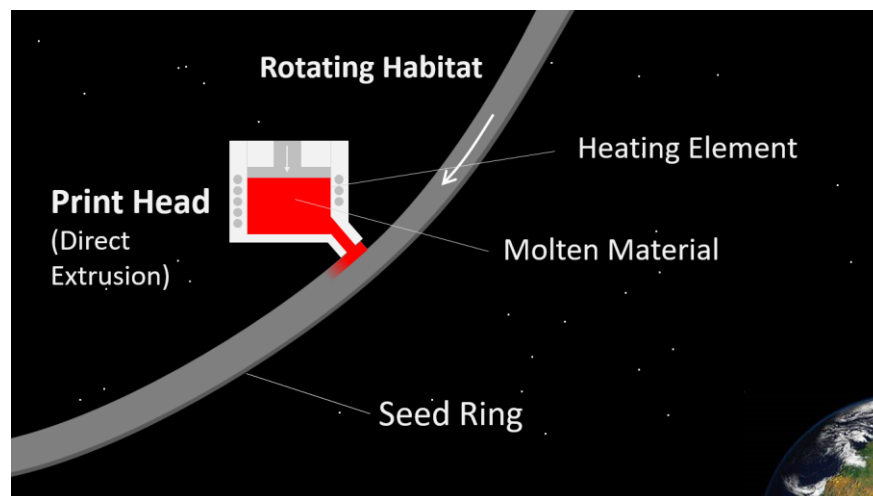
Direct extrusion process where molten material is forced through a Print Head nozzle onto
